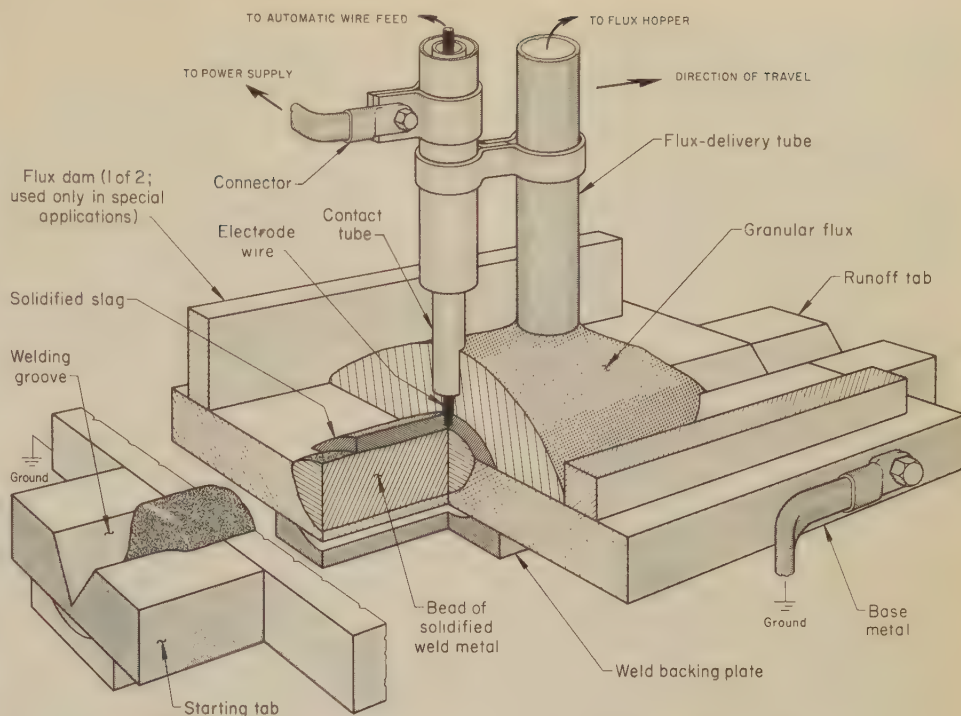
Cutaway view of a single-V-groove weld in a butt joint, showing elements of an automatic submerged-arc welding operation
